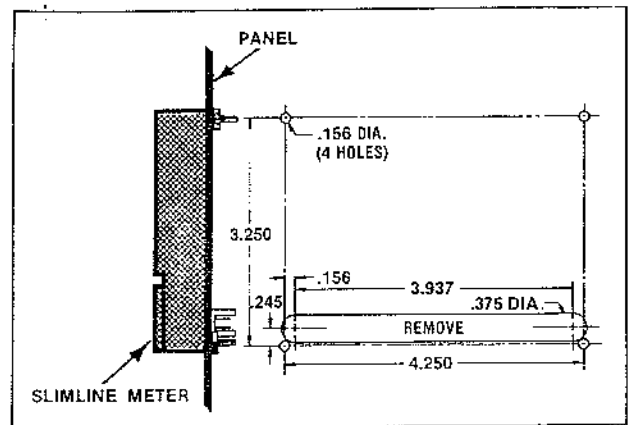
Mounted Slimline meter and universal mounting dimensions.
